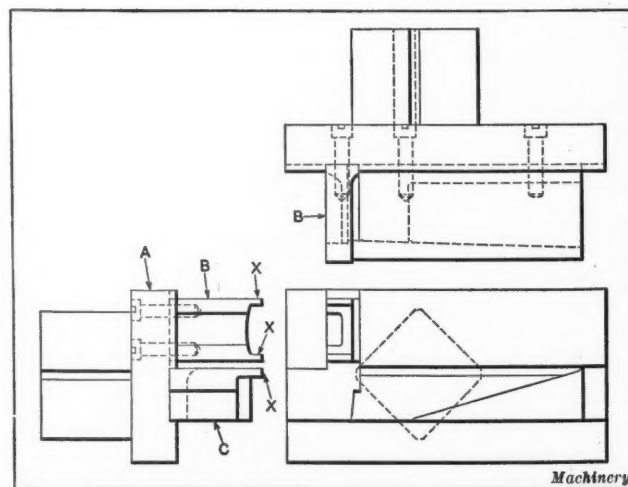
Cutting Tools used in Connection with Die shown in Fig. 1
